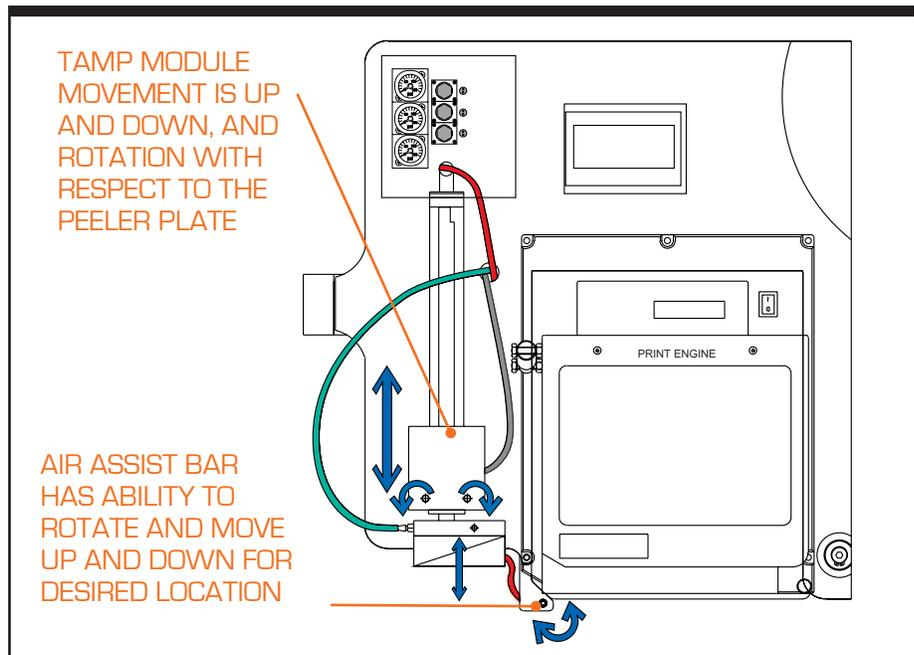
Tamp Assembly Hose Attachments and Movement
